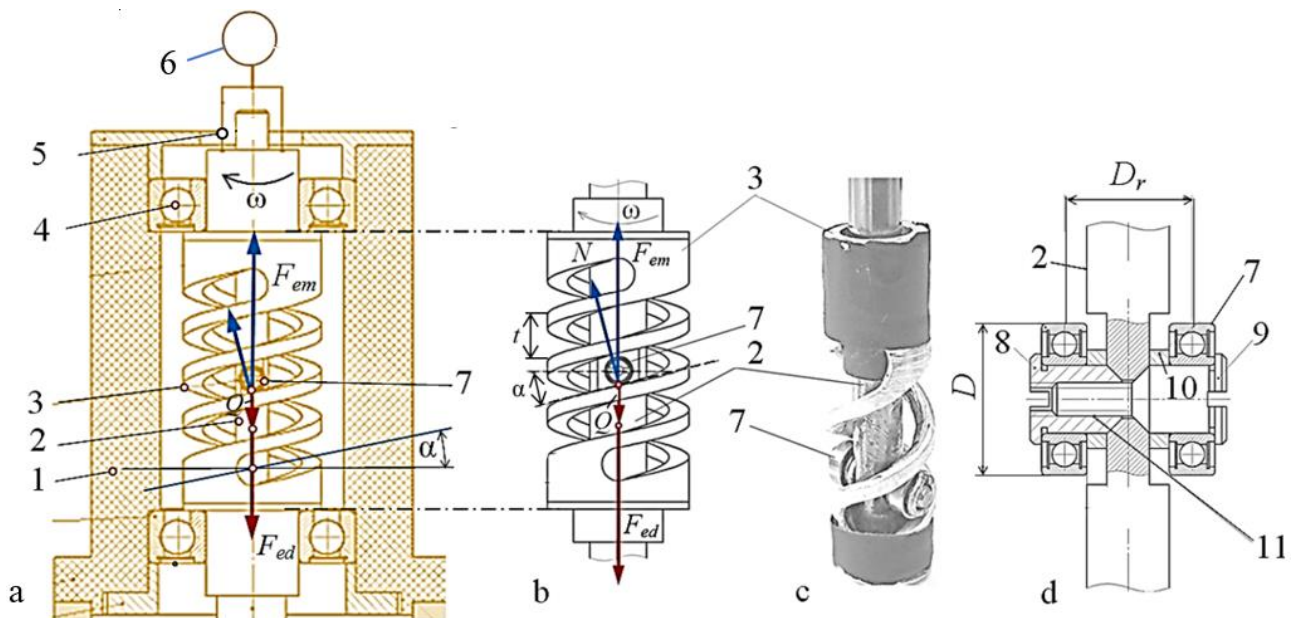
Design of a ball bearing screw converter (a, b, c) and a screw (d).
